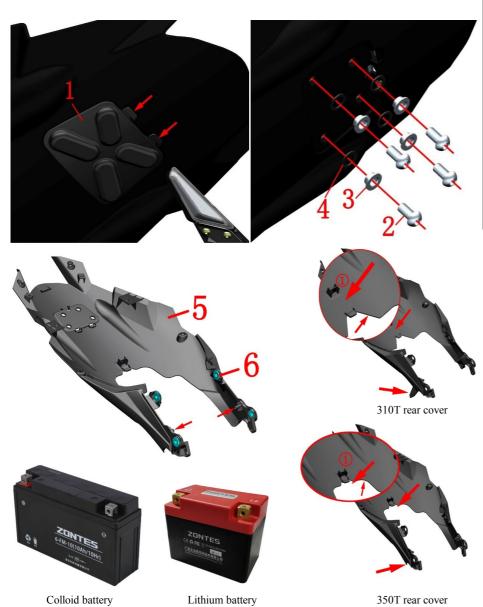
REAR COVER		Rear cover component 2	CHK	40)
